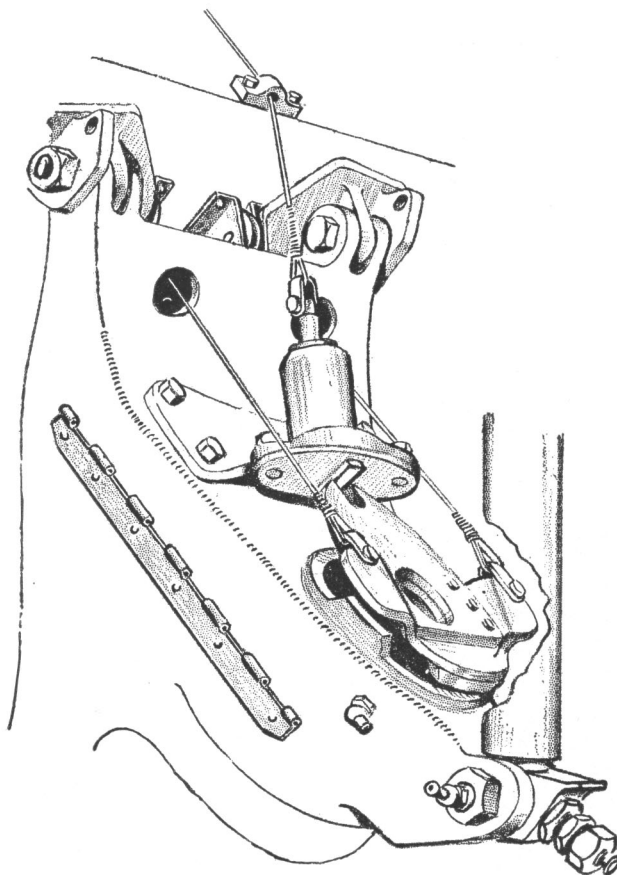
Close-up of the tail-wheel drag yoke, showing the cable-controlled tail-wheel lockpin and cables for steering when the unit is unlocked. The wheel is steerable through a 60-deg arc, but full castering can be accomplished by giving the tail a sharp jerk which overrides the dogs which tend to keep it within a normal arc.
